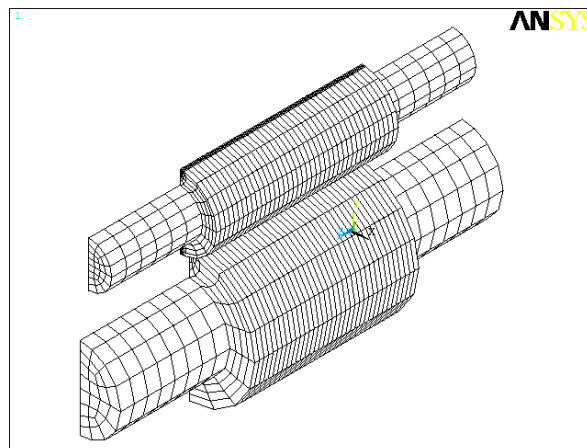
the 3D finite element roll stack model for a 1800 mm 4-hi mill
